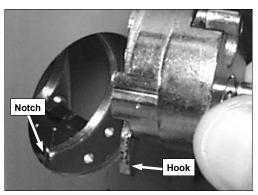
While holding latch in, place hook in front of the latch retractor and through the notch
